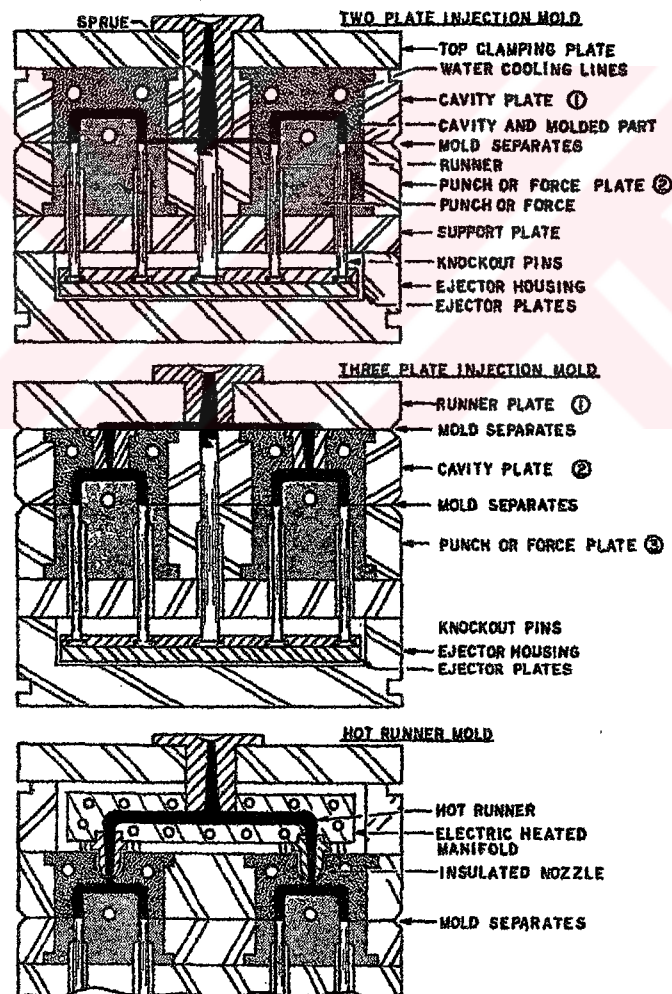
Illustration of Three of Six Basic Types of Injection Moulding Dies (See Figure 3.7 for Other Three Types).
